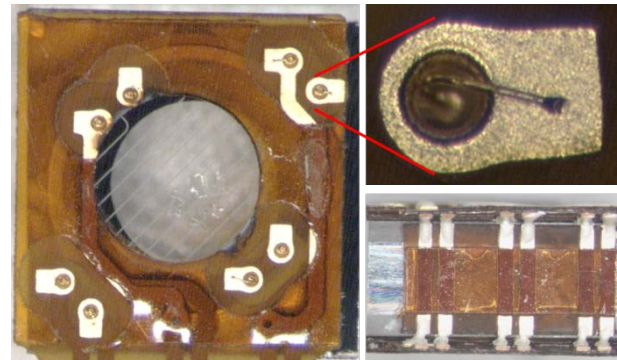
(left) Top view of the cell with attached flexible PCB; (top right) Gold wire bond; (bottom right) Flexible PCB on the cell edge.
